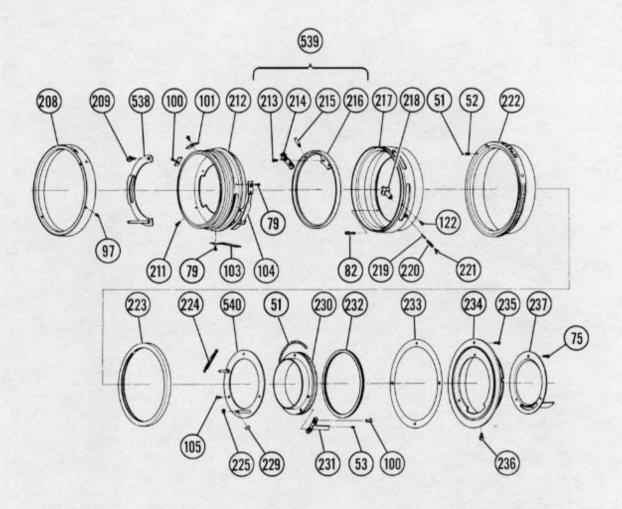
Mount Assembly, Konica (Ref. 551, Pg 58)
